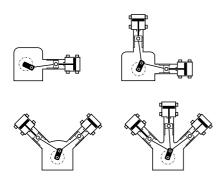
Crosshead compressors Horizontal, L-type, V-type, W-type
